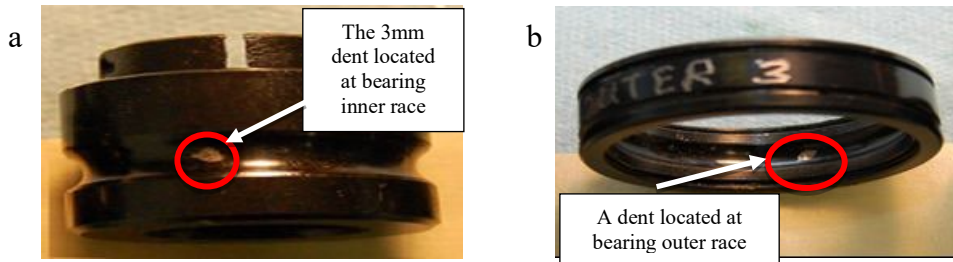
The location of bearing defect (a) inner race (IRF); (b) outer race (ORF)
